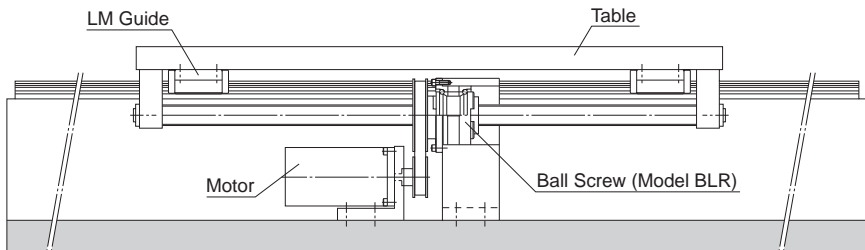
Example of Installation on the Table (Ball Screw Nut Fixed)
